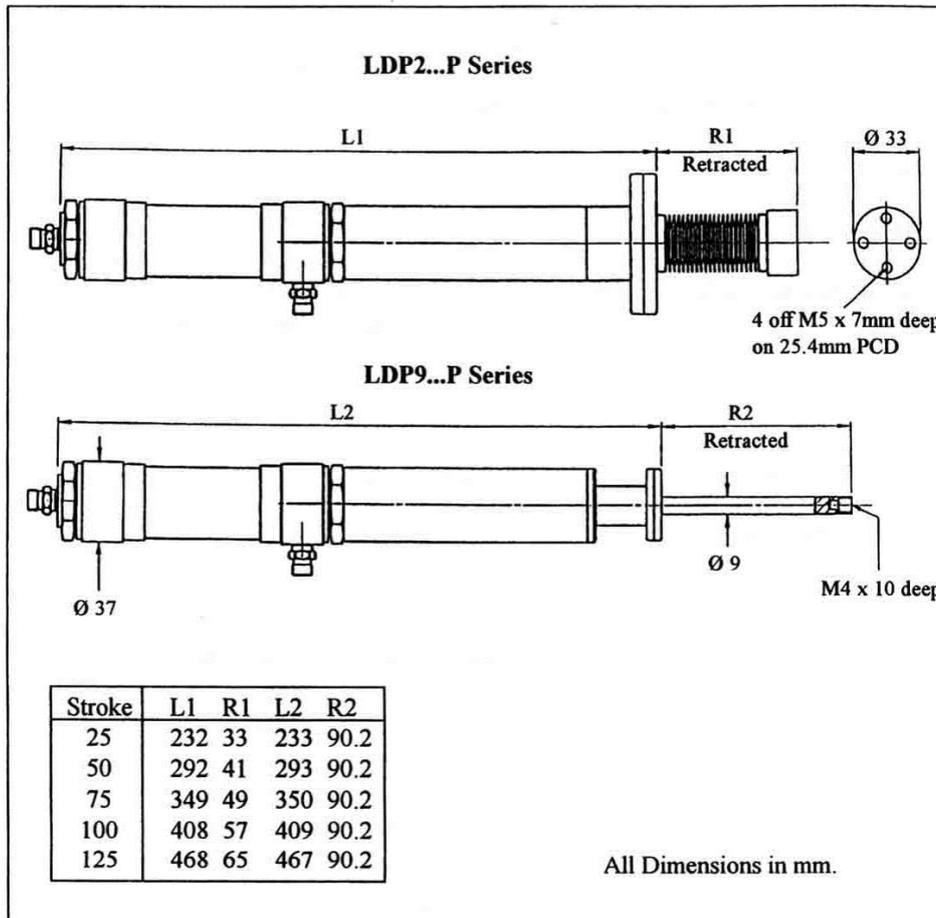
LDP2...P and LDP9...P Pneumatic Linear Motor Drive
